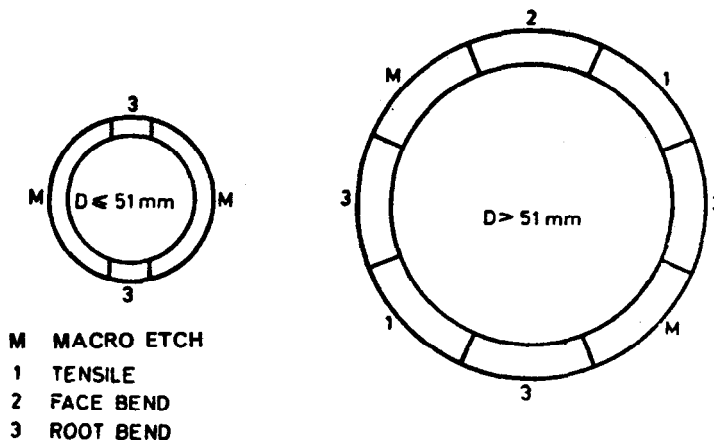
MANNER OF TAKING TEST SPECIMENS FROM TUBES AND PIPES
